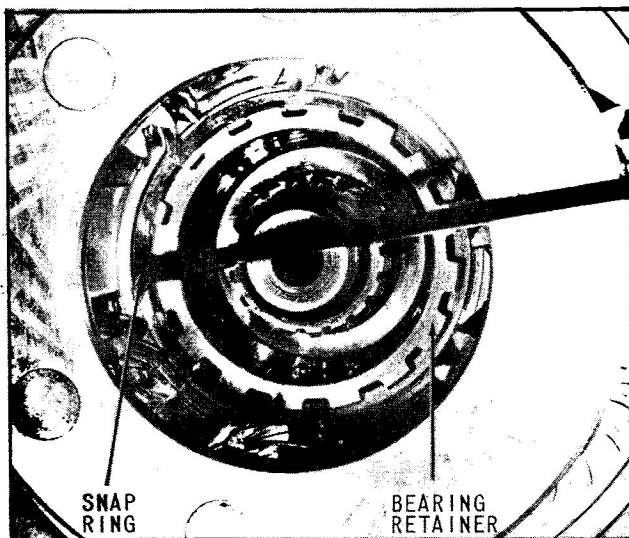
Remove Pinion Cage Snap Ring (2 to 1 Ratio)
